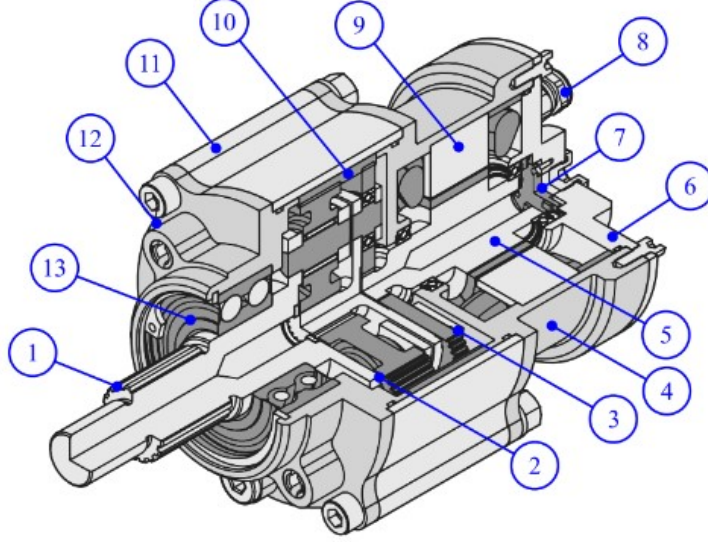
Isometric cut view of the rotary regenerative damper prototype.[20] Splined input shaft (1), first stage (2), second stage (3), motor casing (4), rotor (5), back cover (6), angular position sensor (7), cable gland [$\times 4$] (8), stator (9), outer ring gear (10), gearbox casing (11), front cover (12), input bearing (13).
